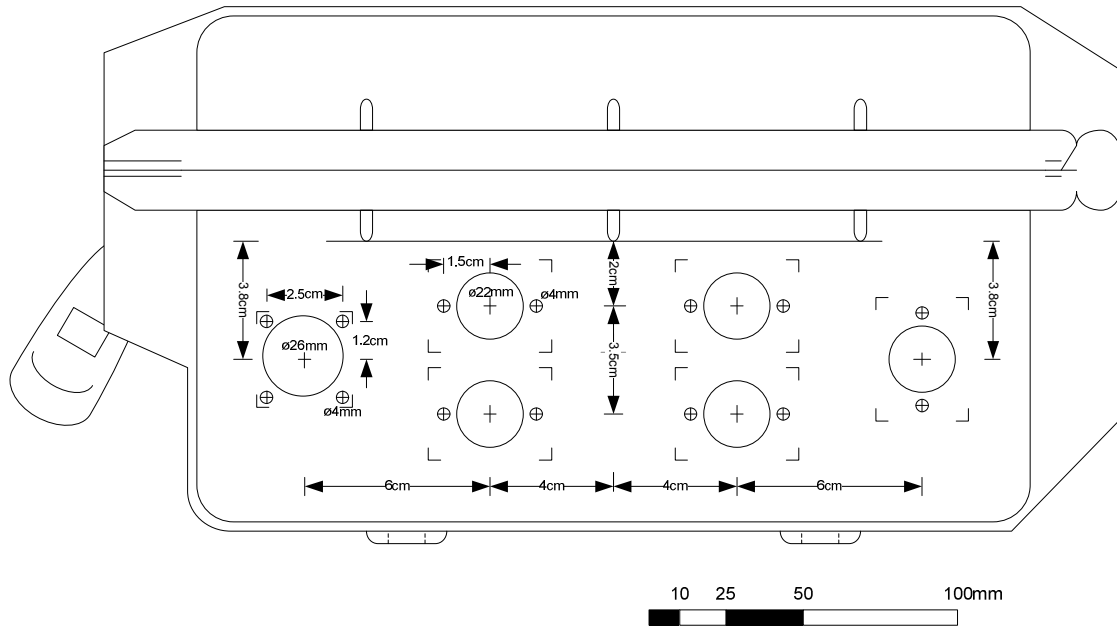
Pelicase[®] 1450, right and left side holes mask.
